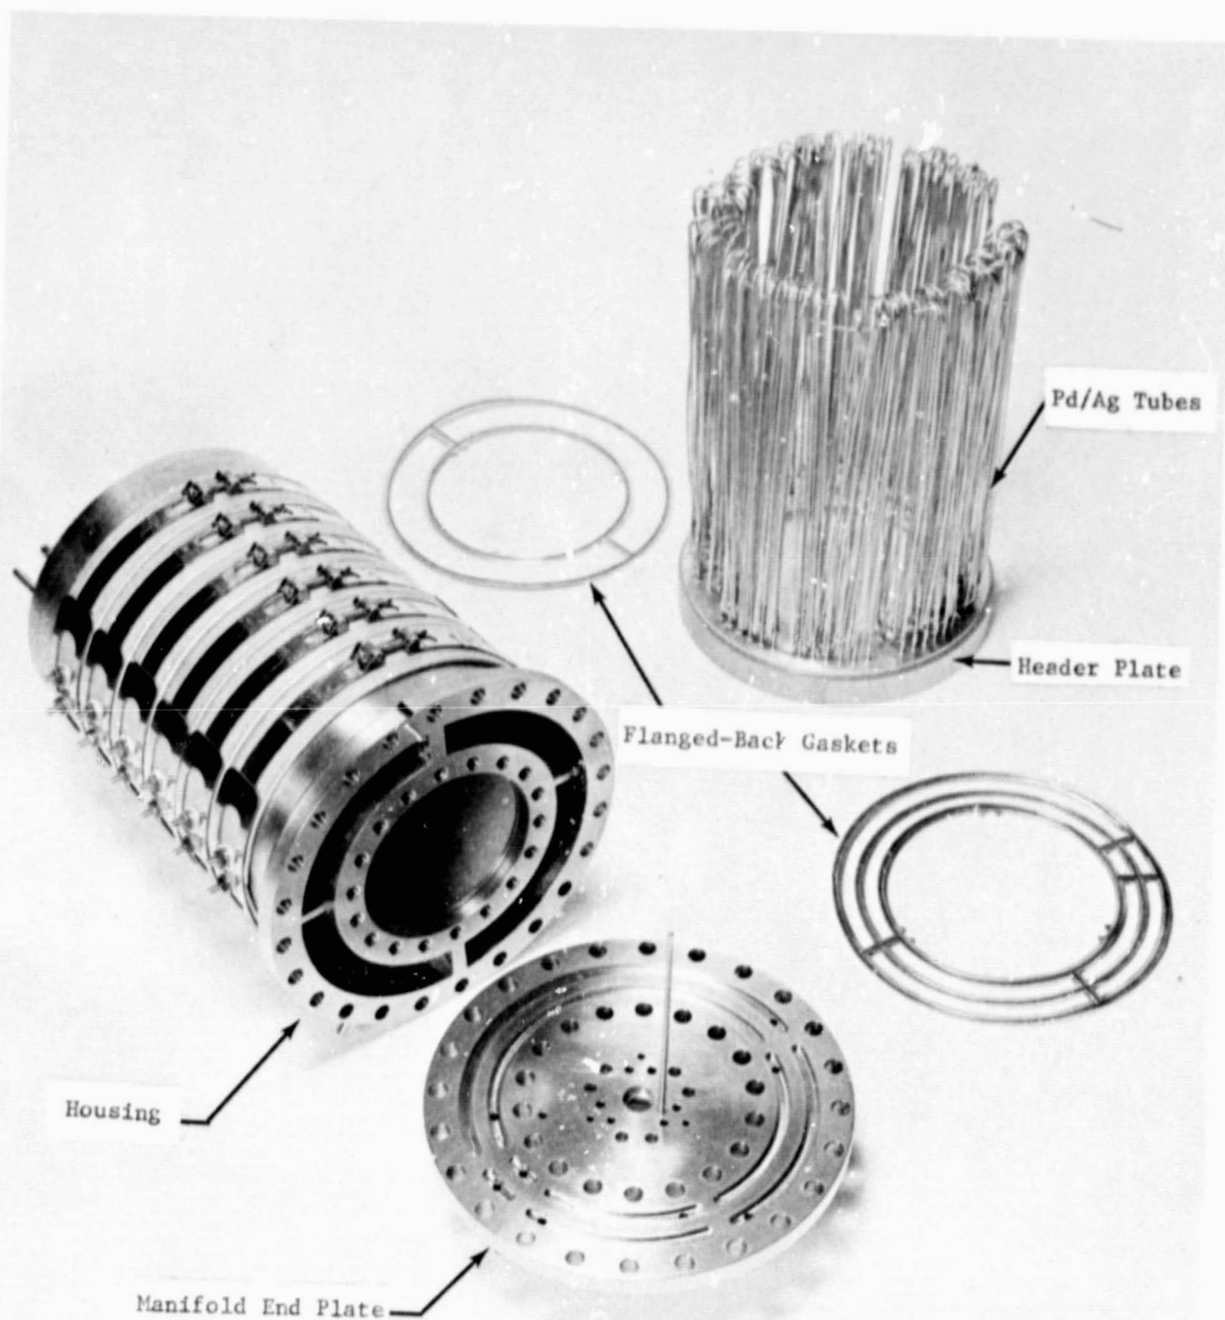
SEPARATOR STAGES (DISASSEMBLED)
